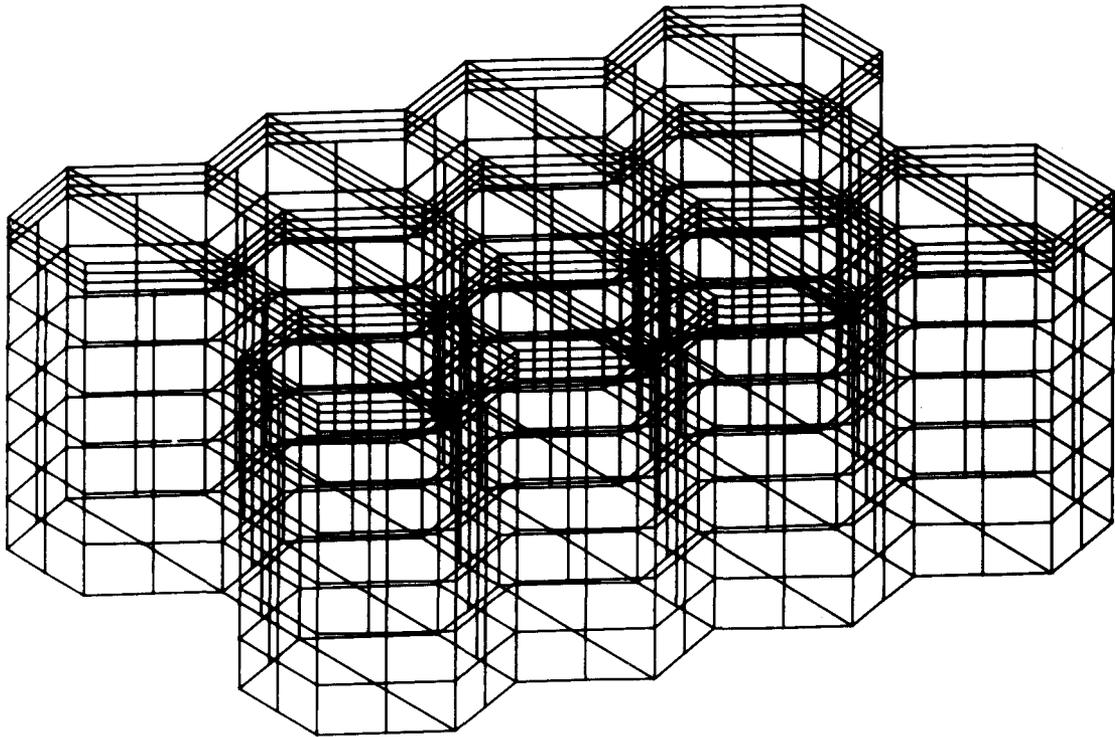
MODEL OF SECTION OF 1.8m HONEYCOMB MIRROR BLANK
